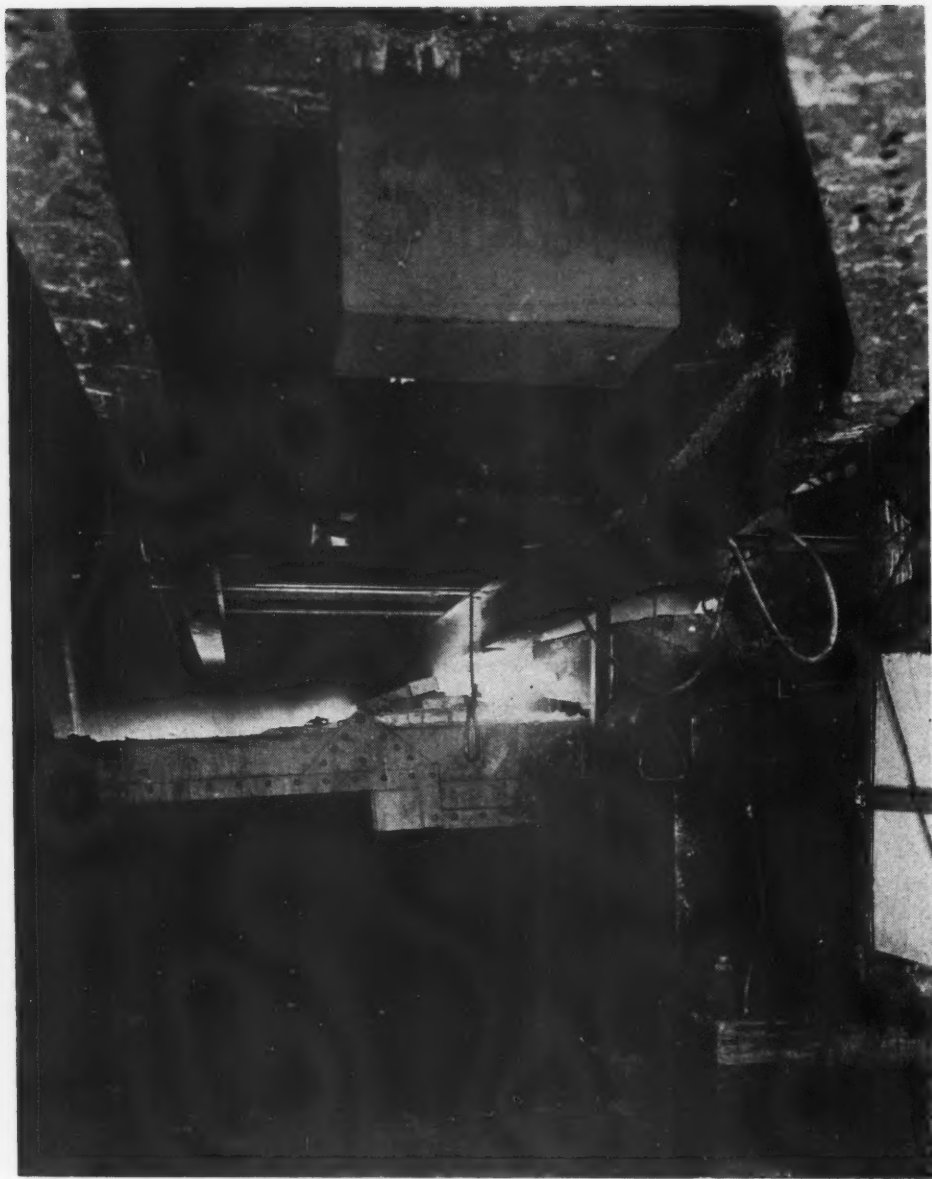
View of the hot metal transfer runner from the 15-ton electric furnace to the coal fired holding units.
